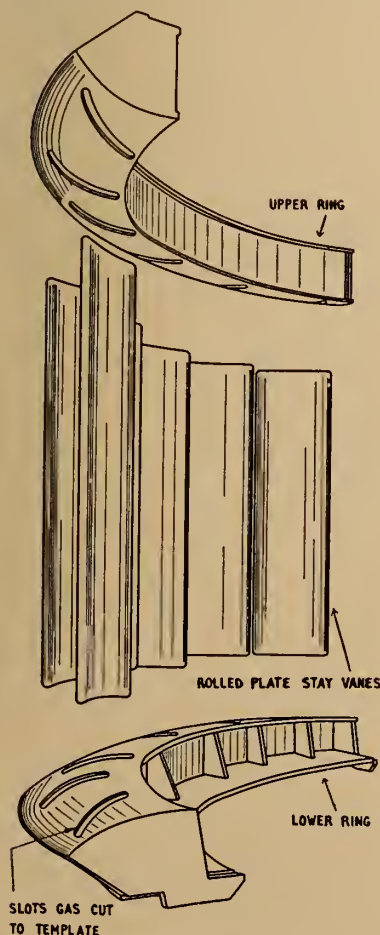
Shop assembly of large fabricated components for St. Lawrence power project.
